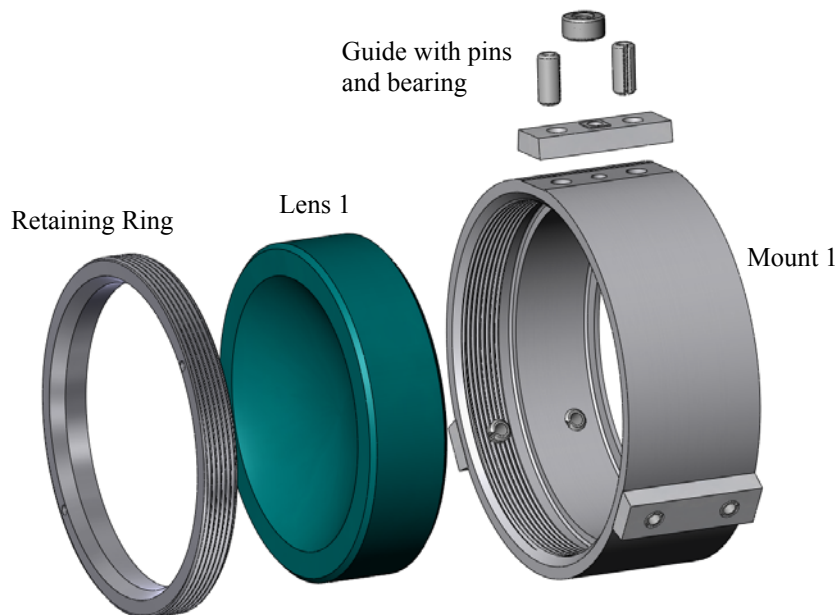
Exploded view of prototype 3.4 mount one for lens 1.
